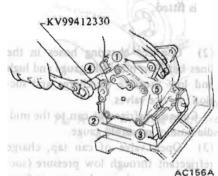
Sequence of Removing Rear Cover Mounting Bolts
